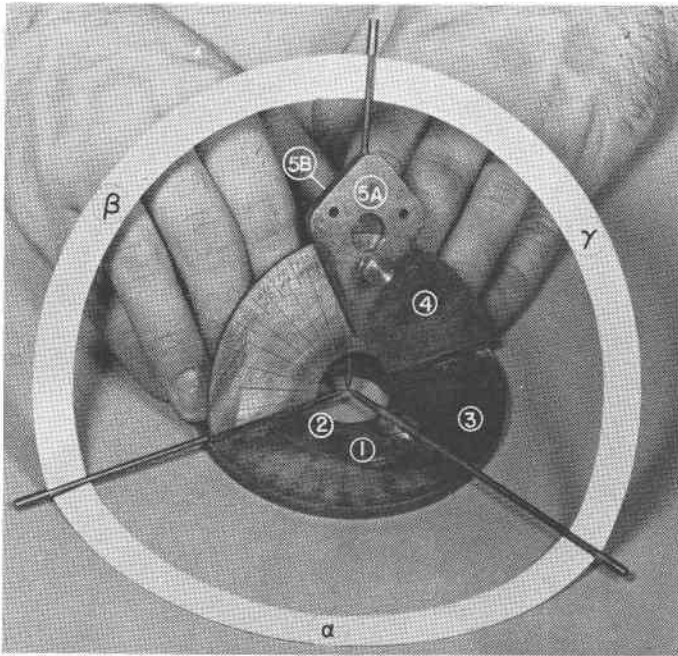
The goniometer jig showing the three principal angles. Numbers refer to parts in Fig. 4.
